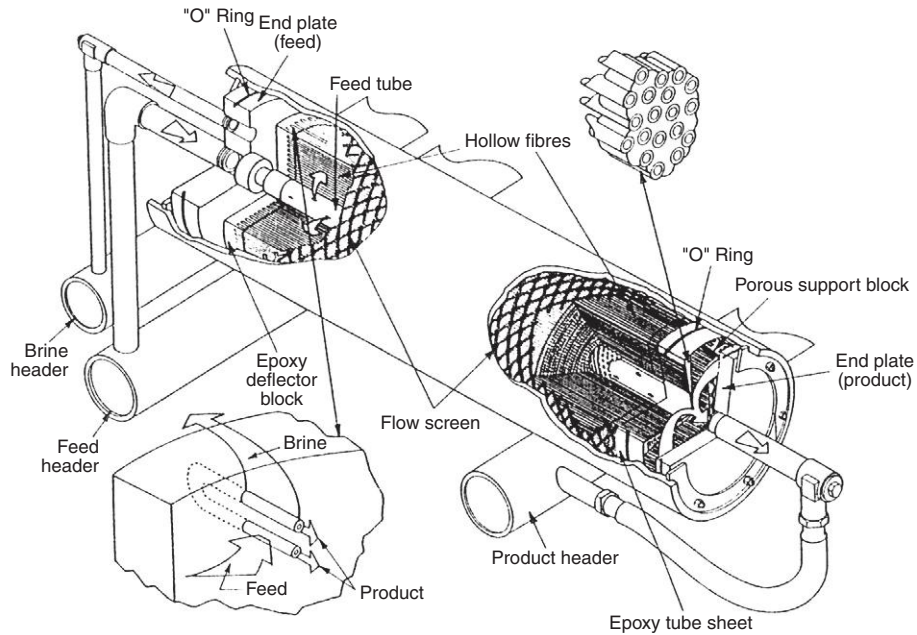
A DuPont hollow fibre RO membrane module assembly.
